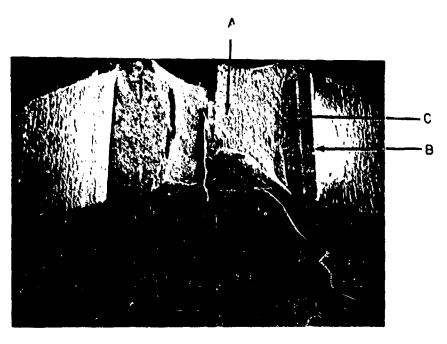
Fracture surface of a temper-embrittled HY-130 fatigue specimen, 8x.
